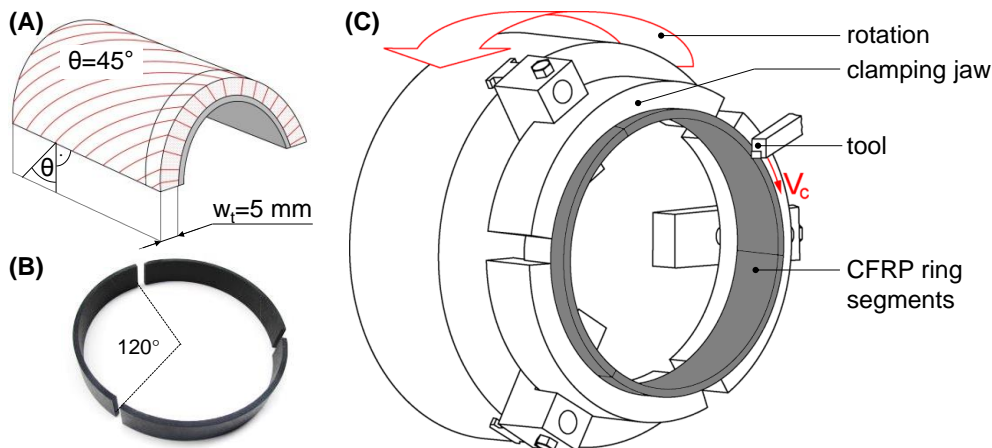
CFRP raw material with indicated UD fiber orientation by red lines (A); CFRP segments prior to machining (B); CFRP workpieces clamped into machine tool (C)
